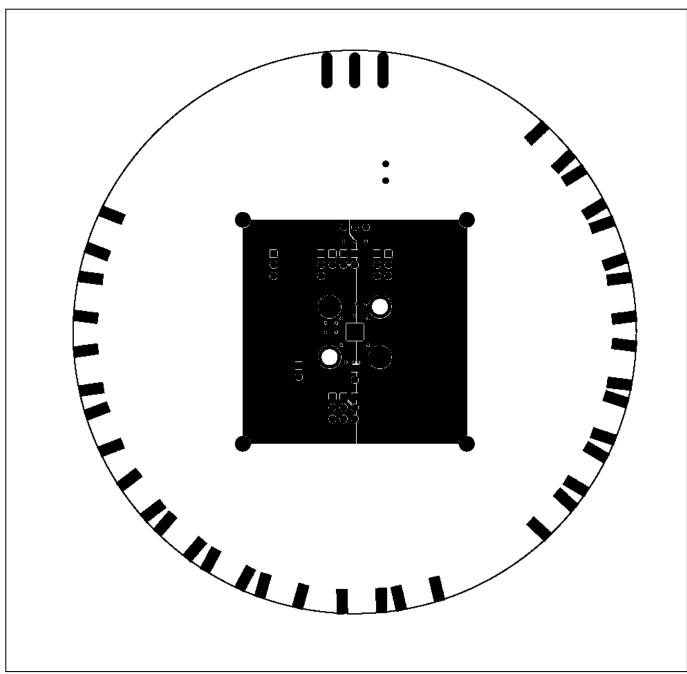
MAX3882 EV Kit PC Board Layout-Solder Side
